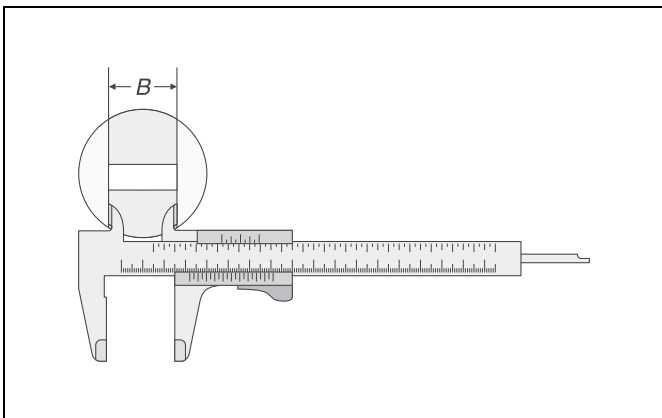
Determination of an inside dimension with the acute measuring shanks
